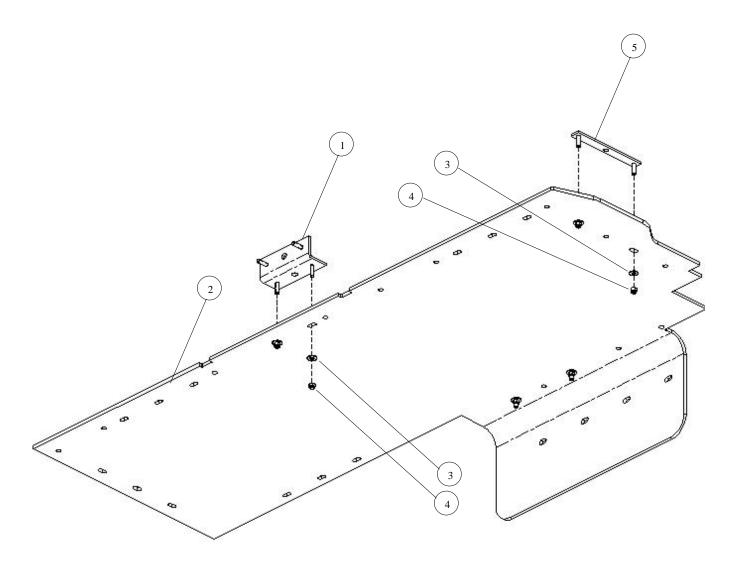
Right Mine Blast Panel Pre-Assembly.
